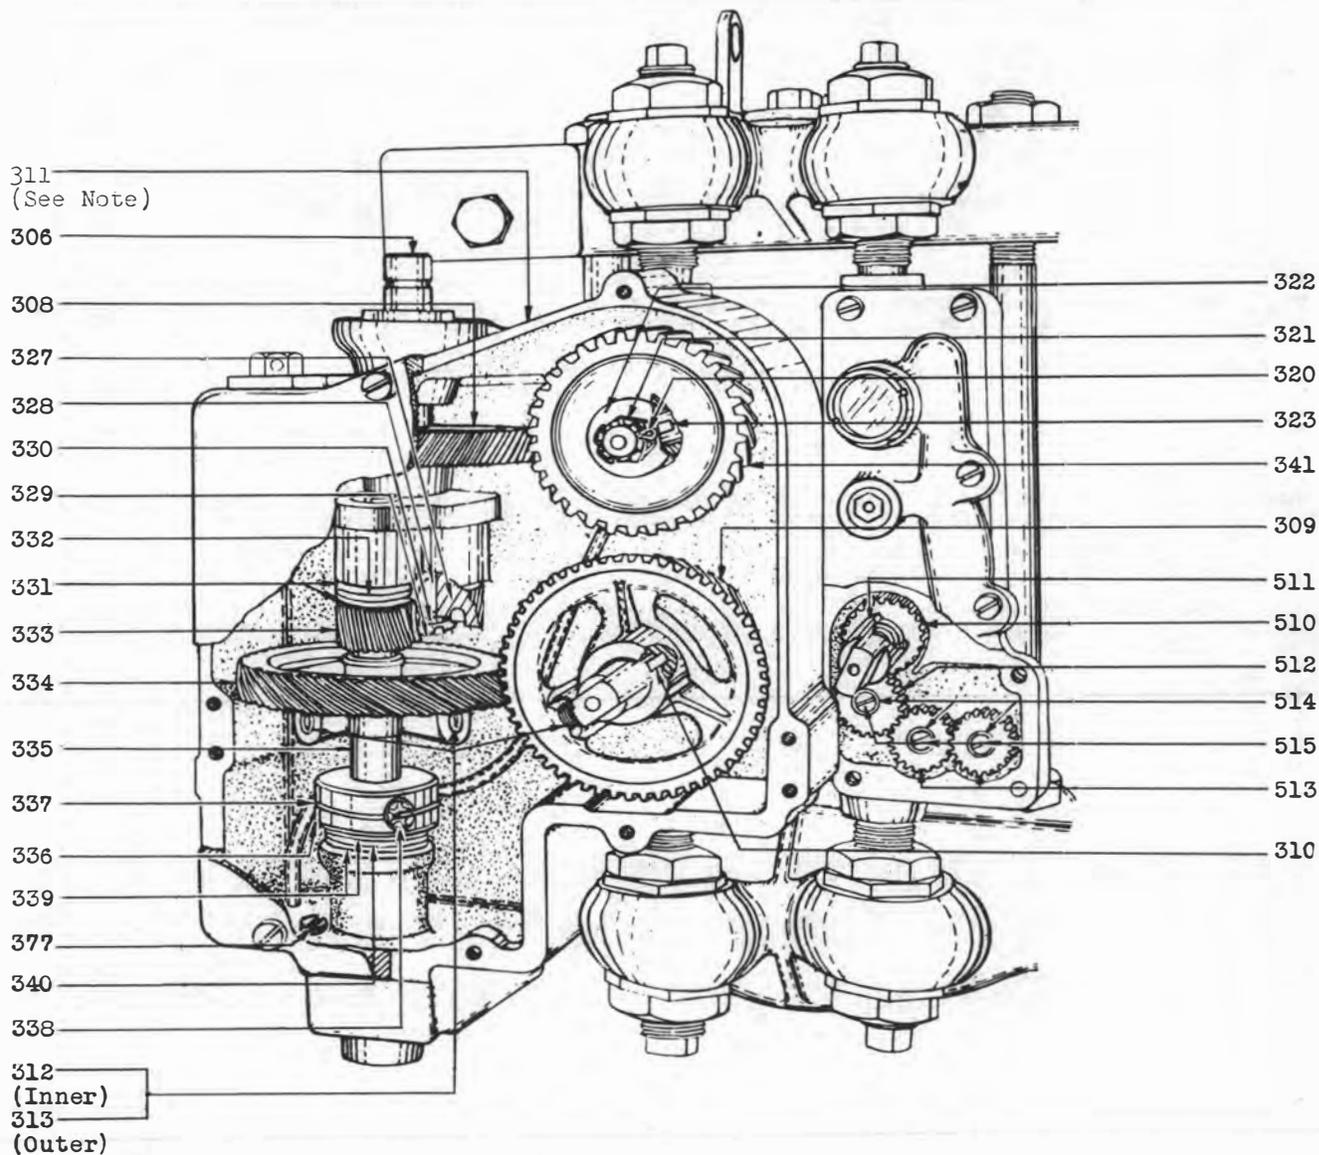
Internal Parts - Gear Case and Bearing Box
